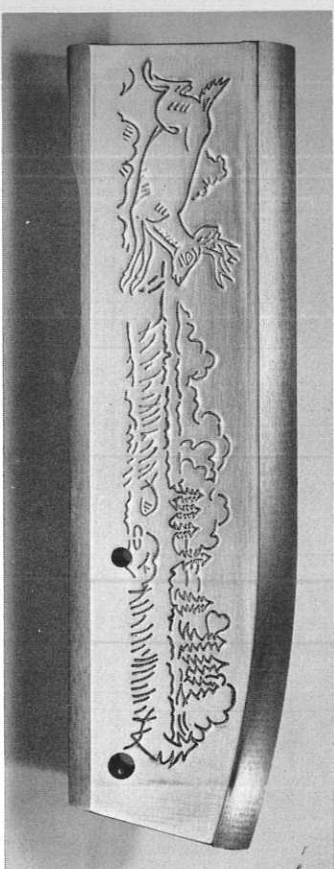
Fine definition of an EC machined motif on a rifle stock. (Courtesy of the Anocut Engineering Company.)
